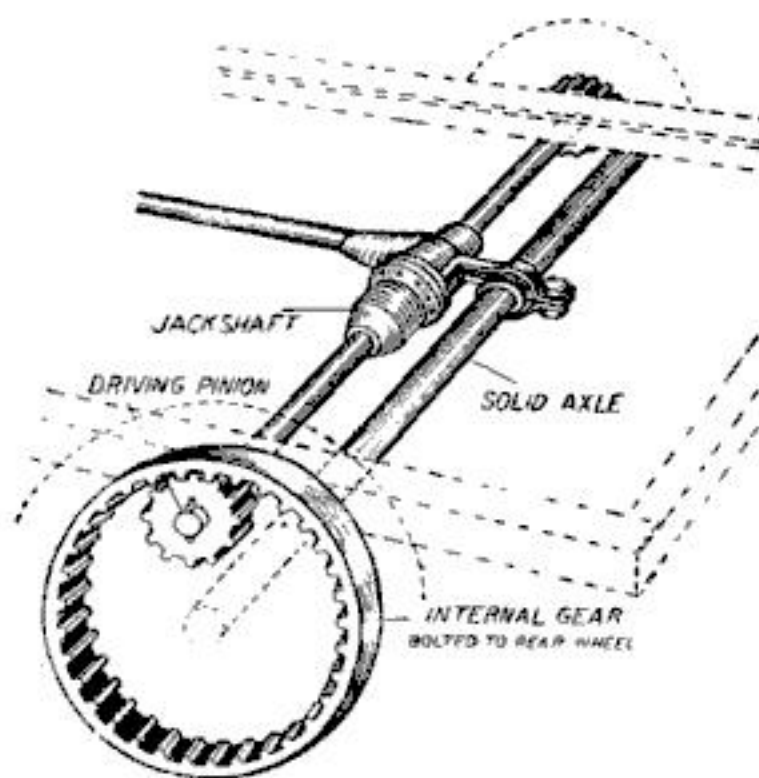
Internal-gear drive. A jackshaft pinions with two large meshed wheels on the back axle
